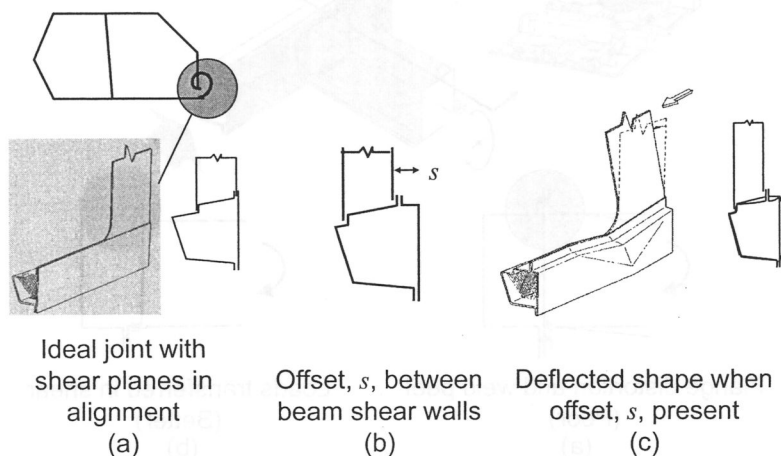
Lower-hinge-pillar-to-rocker joint.
